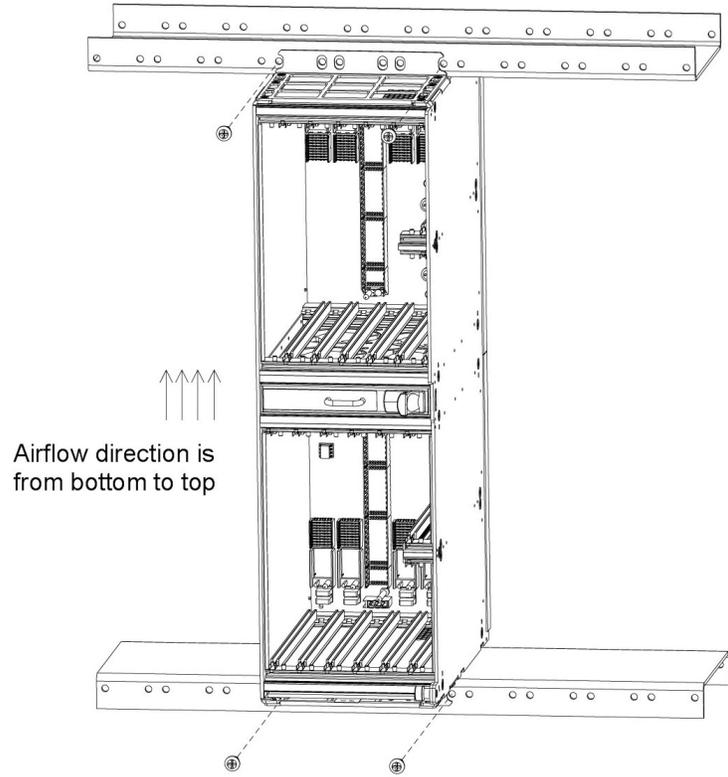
Mounting the Allied Telesis 9810 Chassis into a Horizontal Rack Mount.
